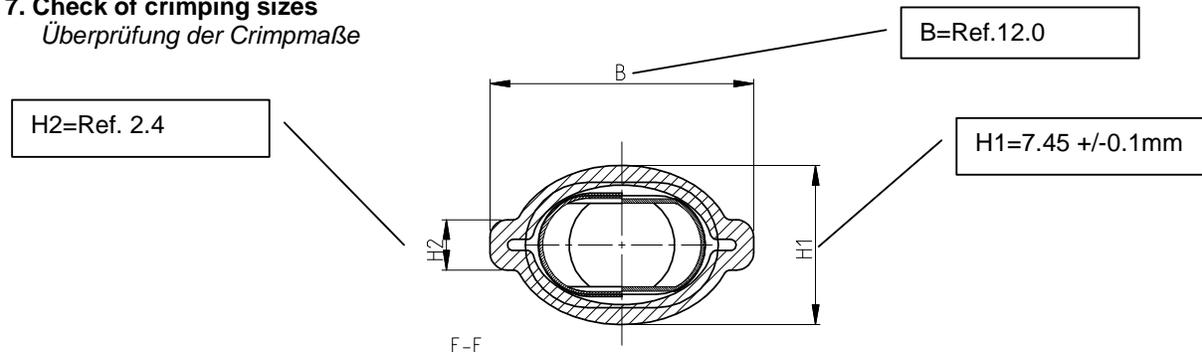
/ Bild 8 inspection dimension of isolation crimp / Kontrollmaß für Isolationscrimp
